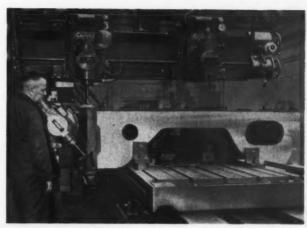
This set-up on a Churchill slide-way grinder with a 6- by 2-ft. table provices for finishing the bearing surfaces on the outside and inside of an annular rib on the swivel slide for a Butler No. 7A planer. A motor-driven rotary table is mounted on the main table of the machine, and the castiron workpiece is rough ground by a combination of the rotary and longitudinal feed motions. For finishing, the feed motion of the rotary table only is used, and the surfaces are covered in a number of stages. If required, surfaces can be ground slightly convex or concave
